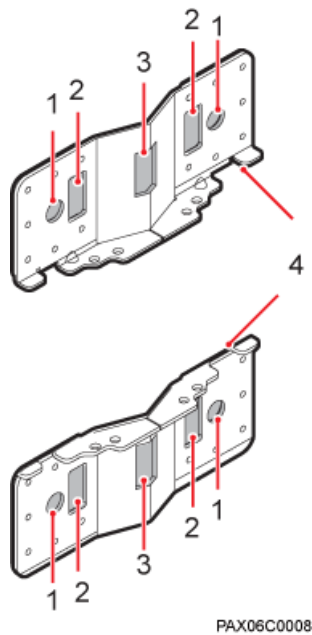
Mounting bracket assembly for installing a BTS3902E
